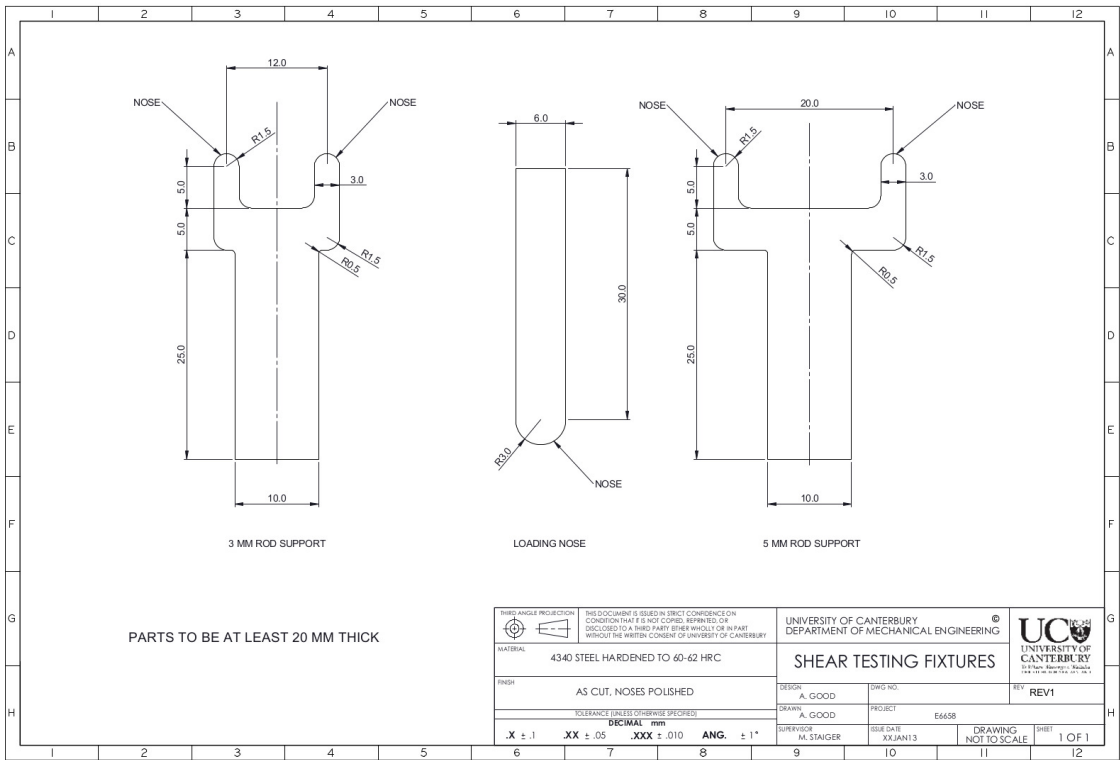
CAD drawing of short beam loading fixtures used in experiments, fixtures designed to meet ASTM D2344
